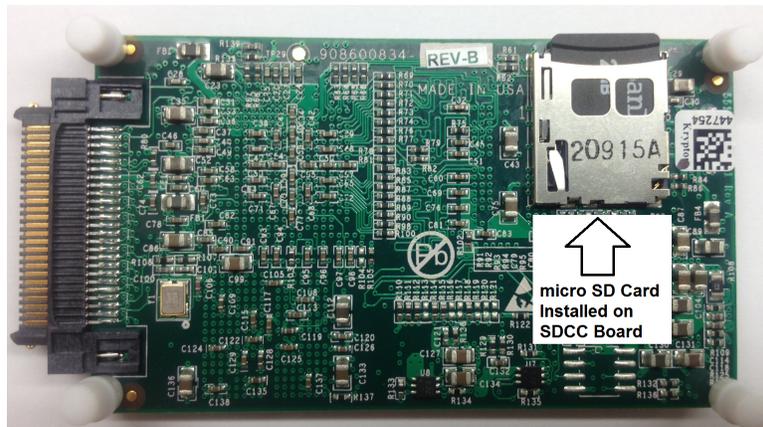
Bottom View of the Simple Capture Card with the microSD Memory Card Installed
